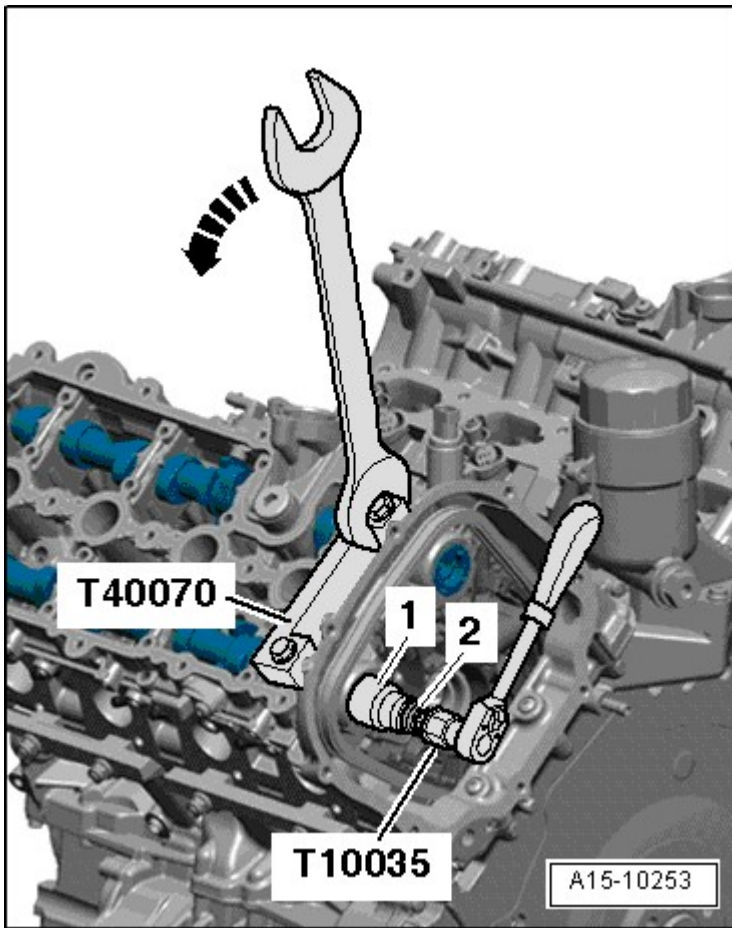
Adapting Camshaft Adjuster Screw And Socket 24 To Exhaust Camshaft
